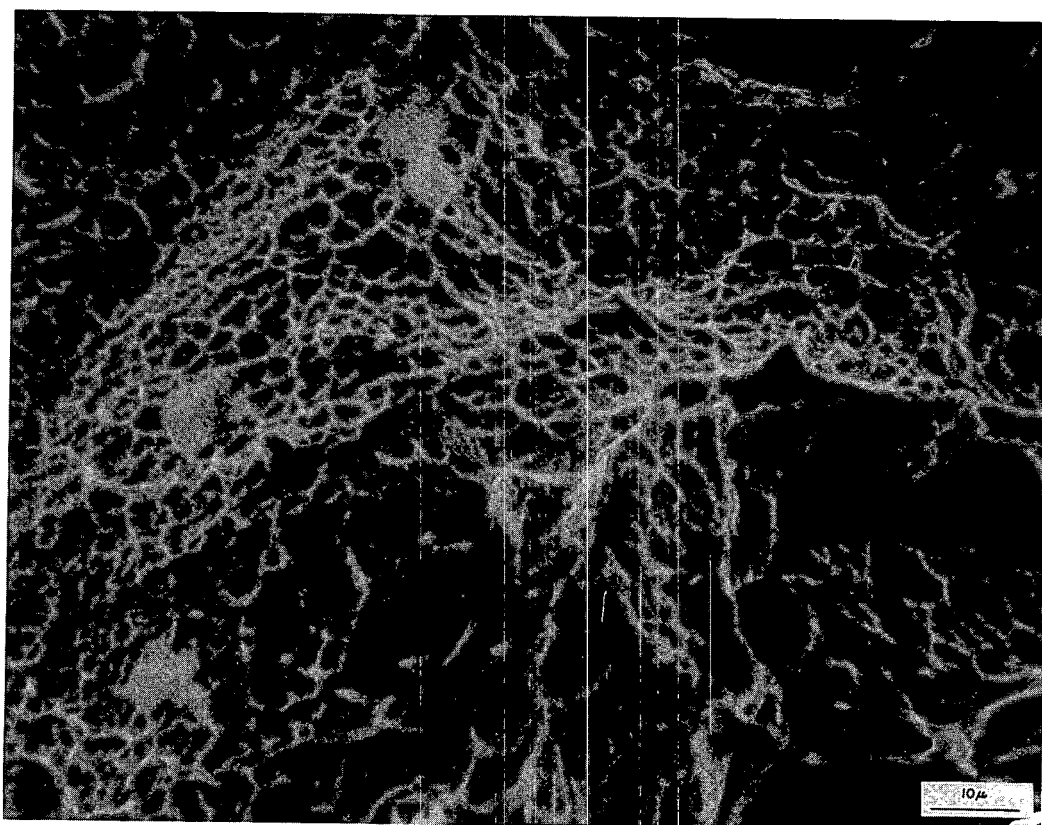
Scanning Electron Fractograph of Fresh Laboratory Fracture
